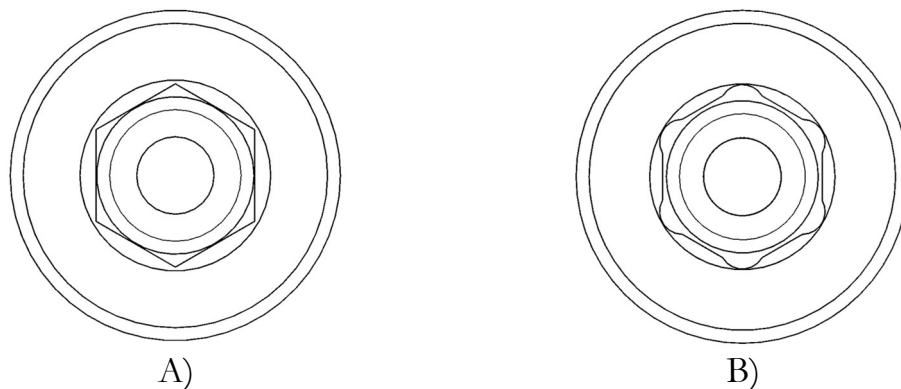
Screw head socket. A, Shape obtained by broaching. B, Shape obtained by milling.
